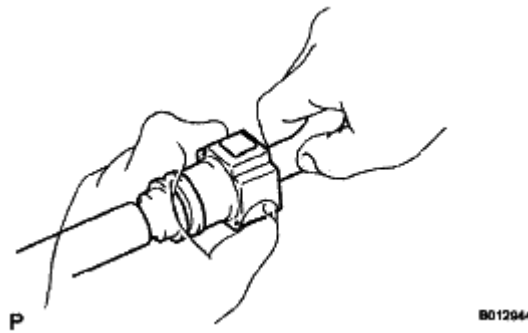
Pushing Fuel Tube Connector To Fuel Pipe
